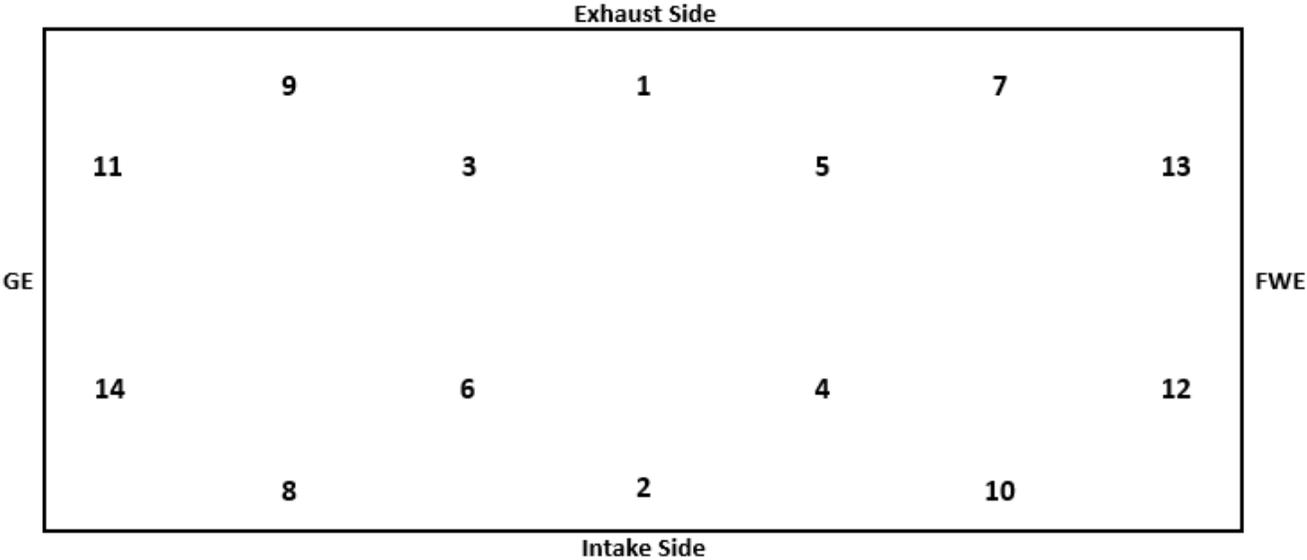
Cylinder Head Torquing Sequence – KP3 Engine
